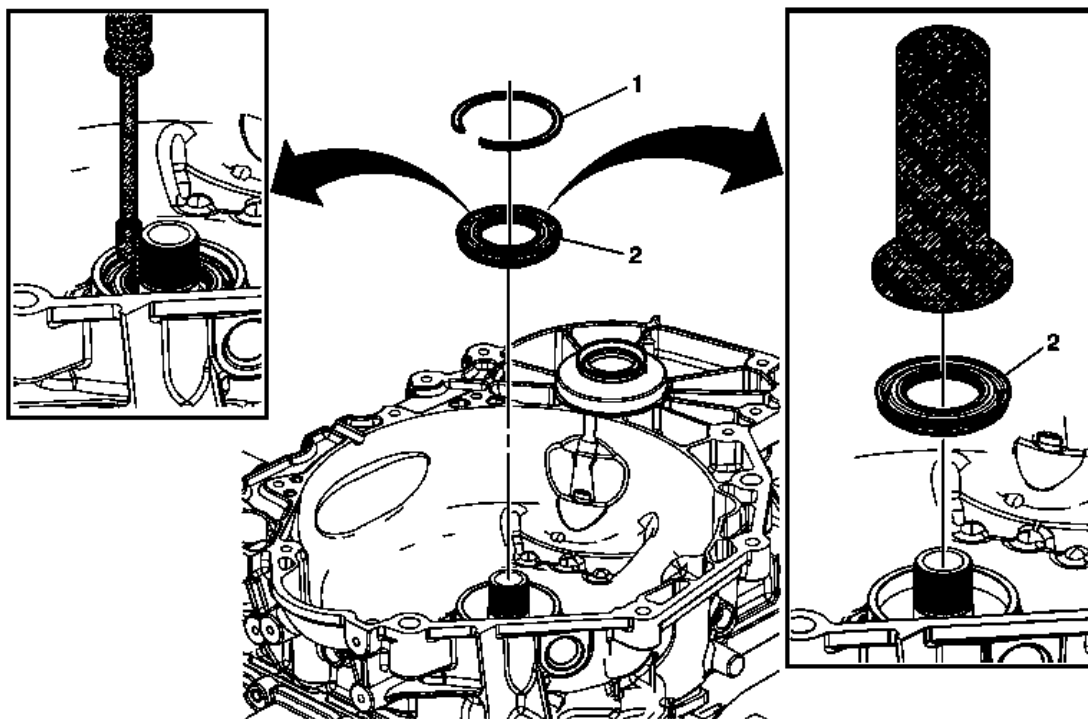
View Of Torque Converter Fluid Seal & Retainer
